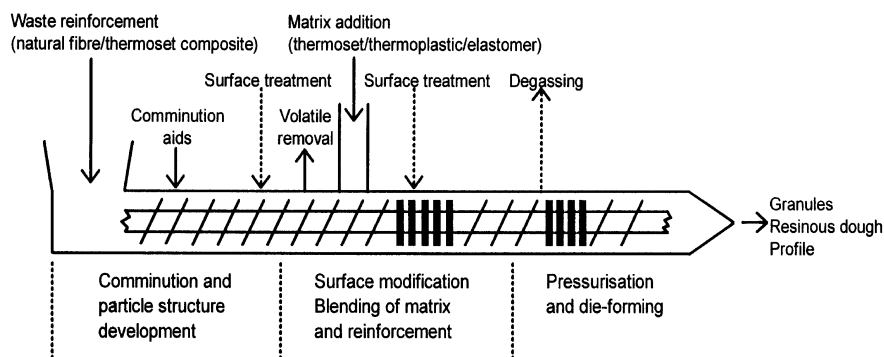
Design principles of direct compounding injection moulding machine for processing highly filled polymer compositions
